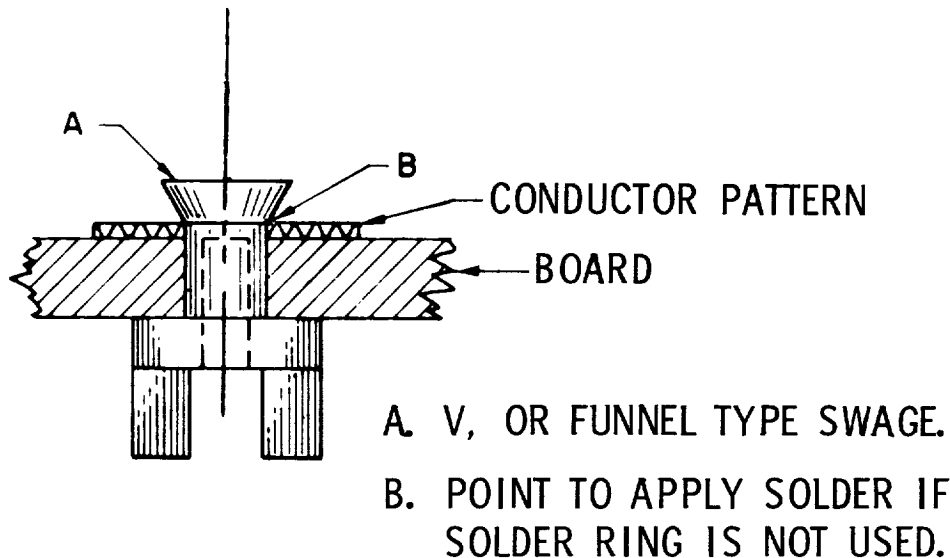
TYPICAL SWAGED TERMINAL ON PRINTED WIRING BOARD
